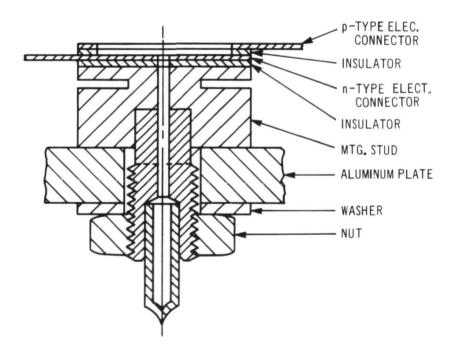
Cold Stack Design (Copper T - Steel Screw) Aluminum Plate.
